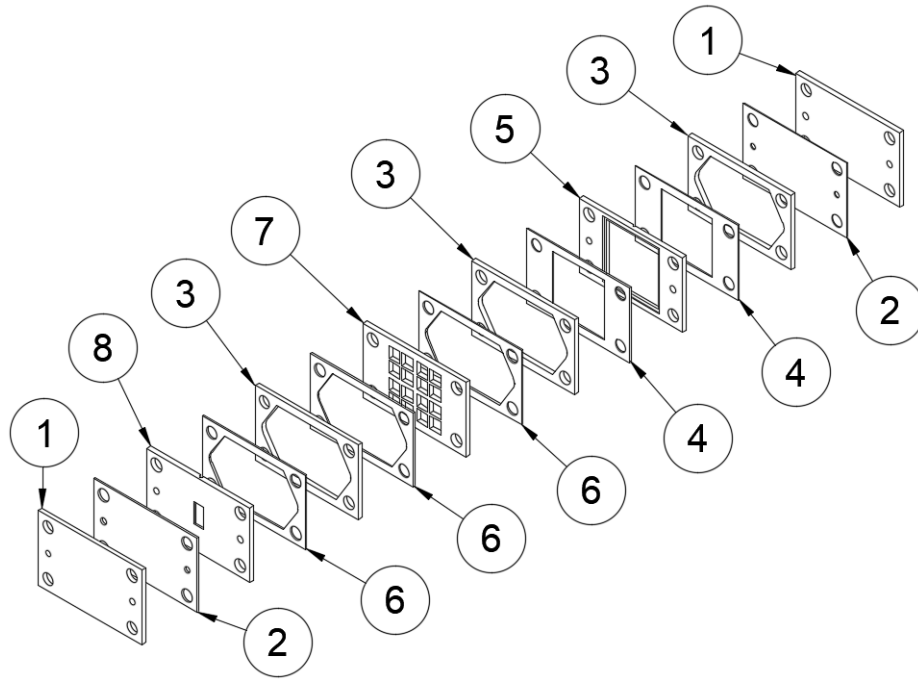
Exploded, Schematic Drawing of the MK 1 cell design.
